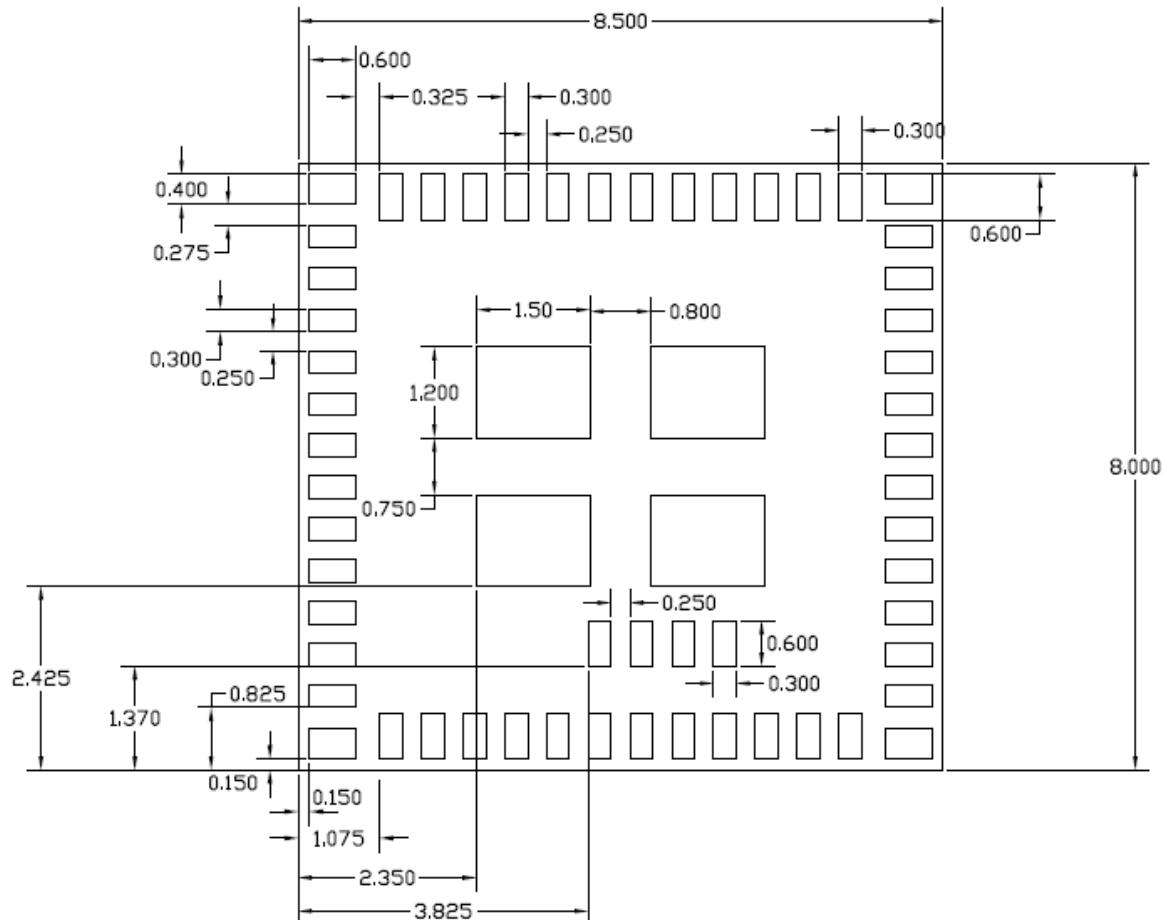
SWB-A31 Mechanical Dimension (Top View)
